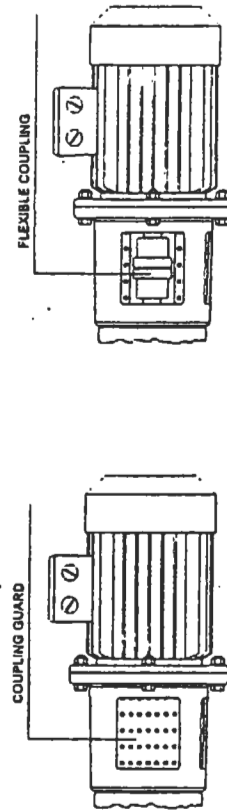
CHECKING THE ALIGNMENT ON MONOBLOCK DESIGN
